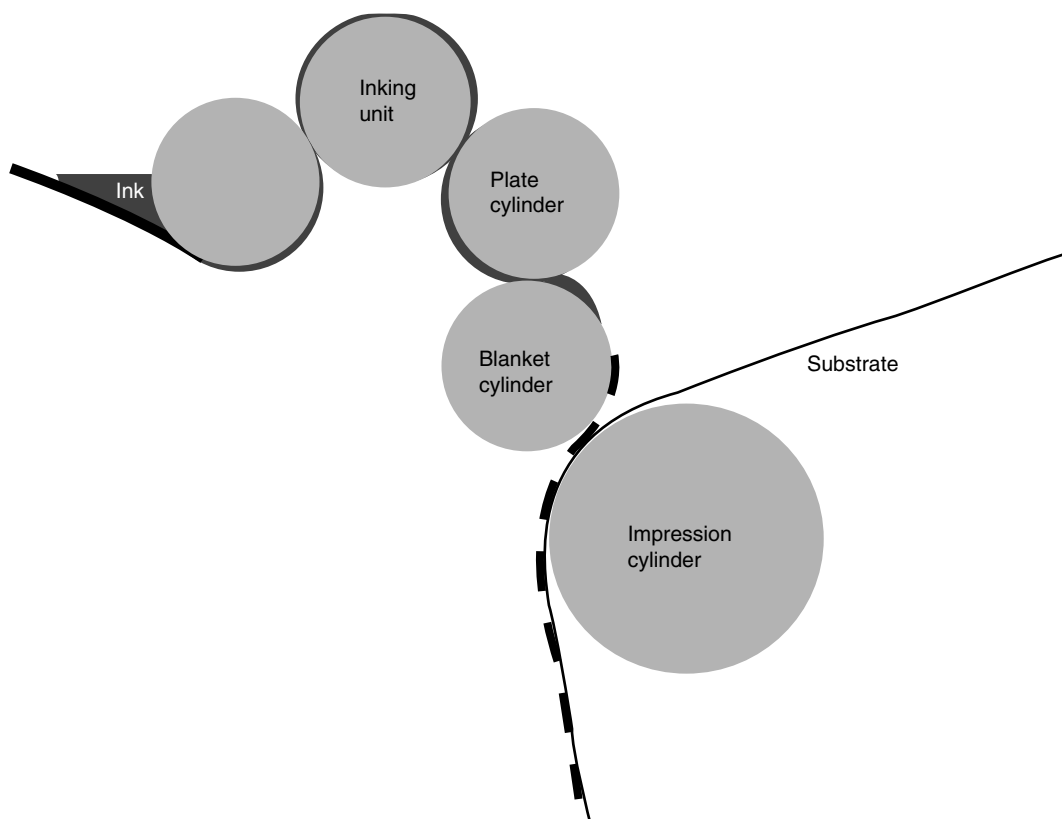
Typical print process for roll-to-roll printing. The blanket cylinder is used for offset printing.
